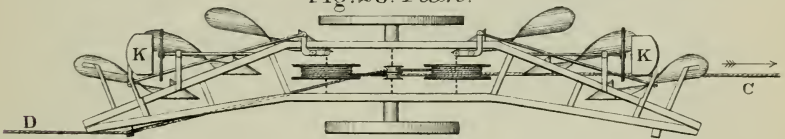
Side Elevation of Slack Gear, enlarged.
